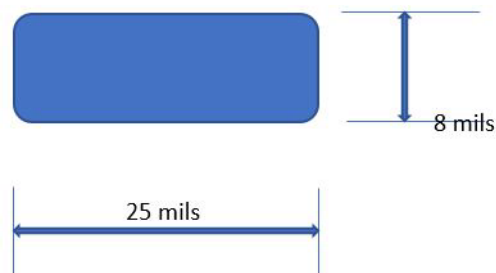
Top View Standard Footprint (Recommended) for CCG6SF 48-QFN
